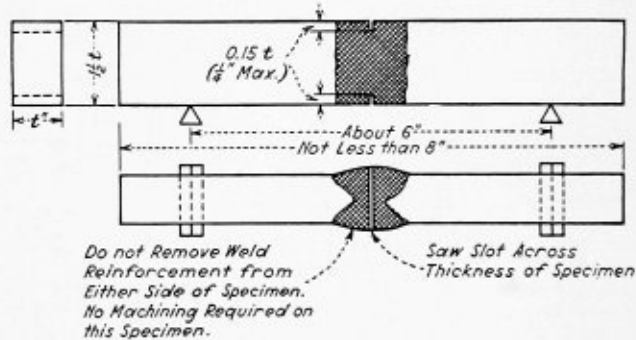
SPECIMEN FOR NICK-BREAK TEST
